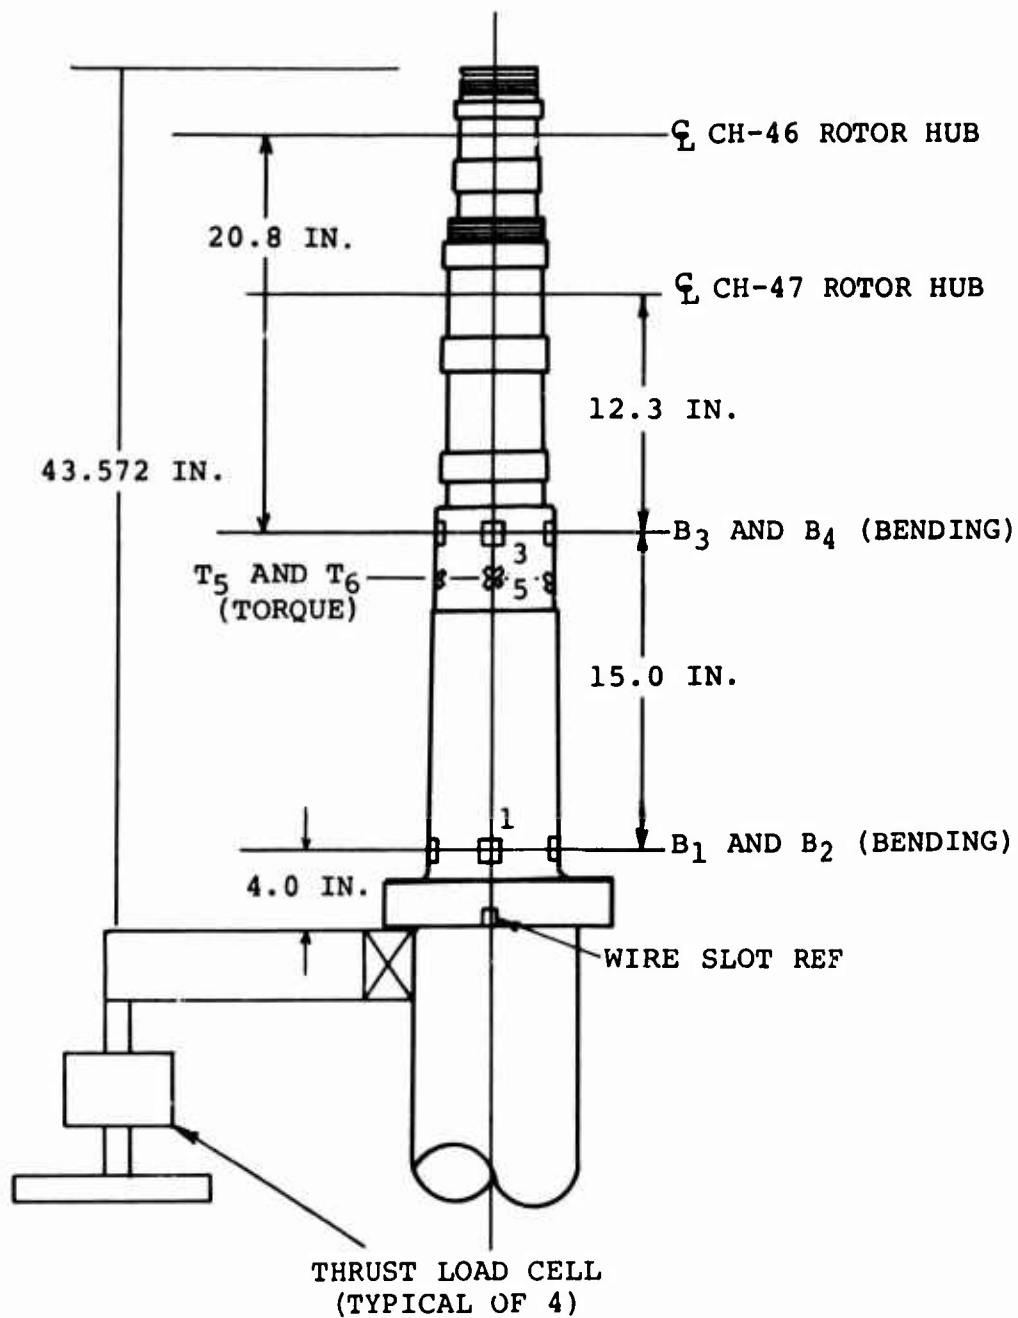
Locations of Gages on Whirl Tower Rotor Shaft.
